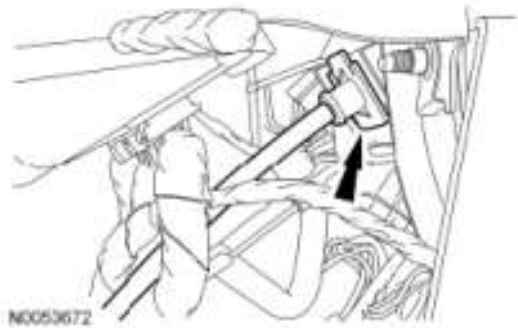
Locating RH And LH Exhaust Flange Nuts
